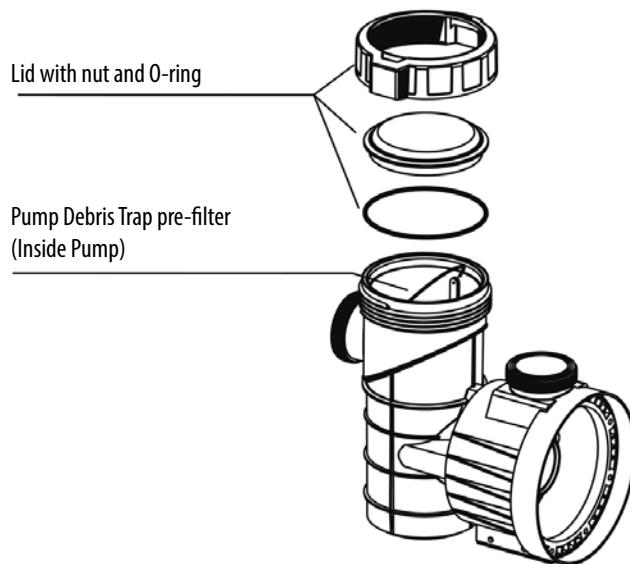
EXPLODED VIEW OF PUMP ASSEMBLY
